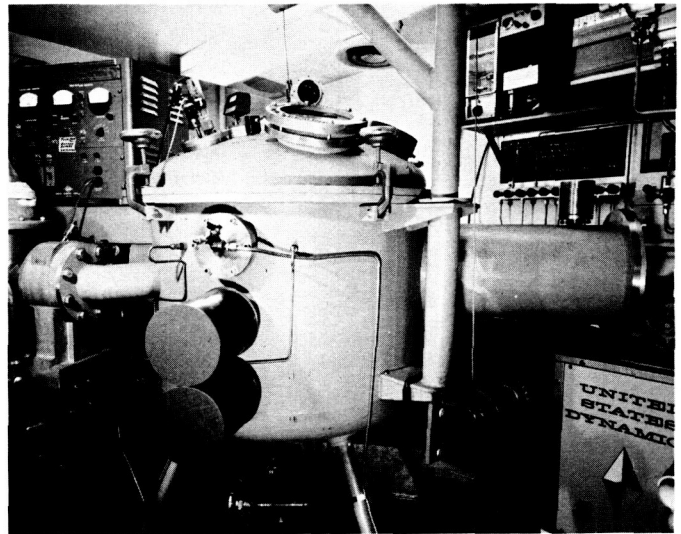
TIG welding drybox with purification and analysis equipment
